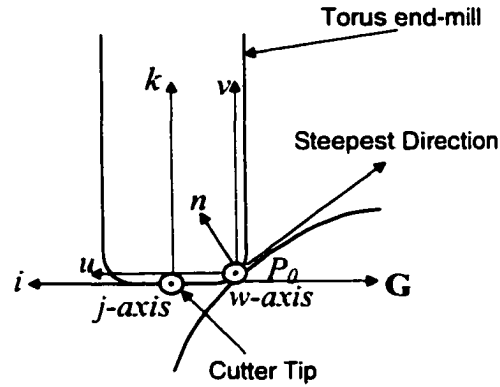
Torus End-mill in Cutter Geometry Frame and Cutter Location Frame
